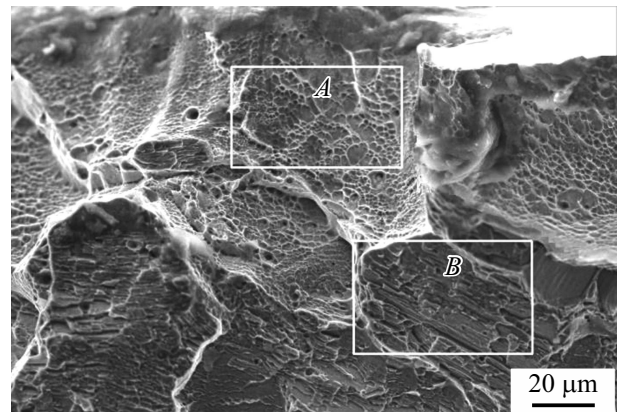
Fractographic image of Cr–Mn–N steel fracture with the surface exposed to prior ultrasonic forge treatment and tested for tensile strength at -196°C . A — viscous fracture, B — brittle fracture.
